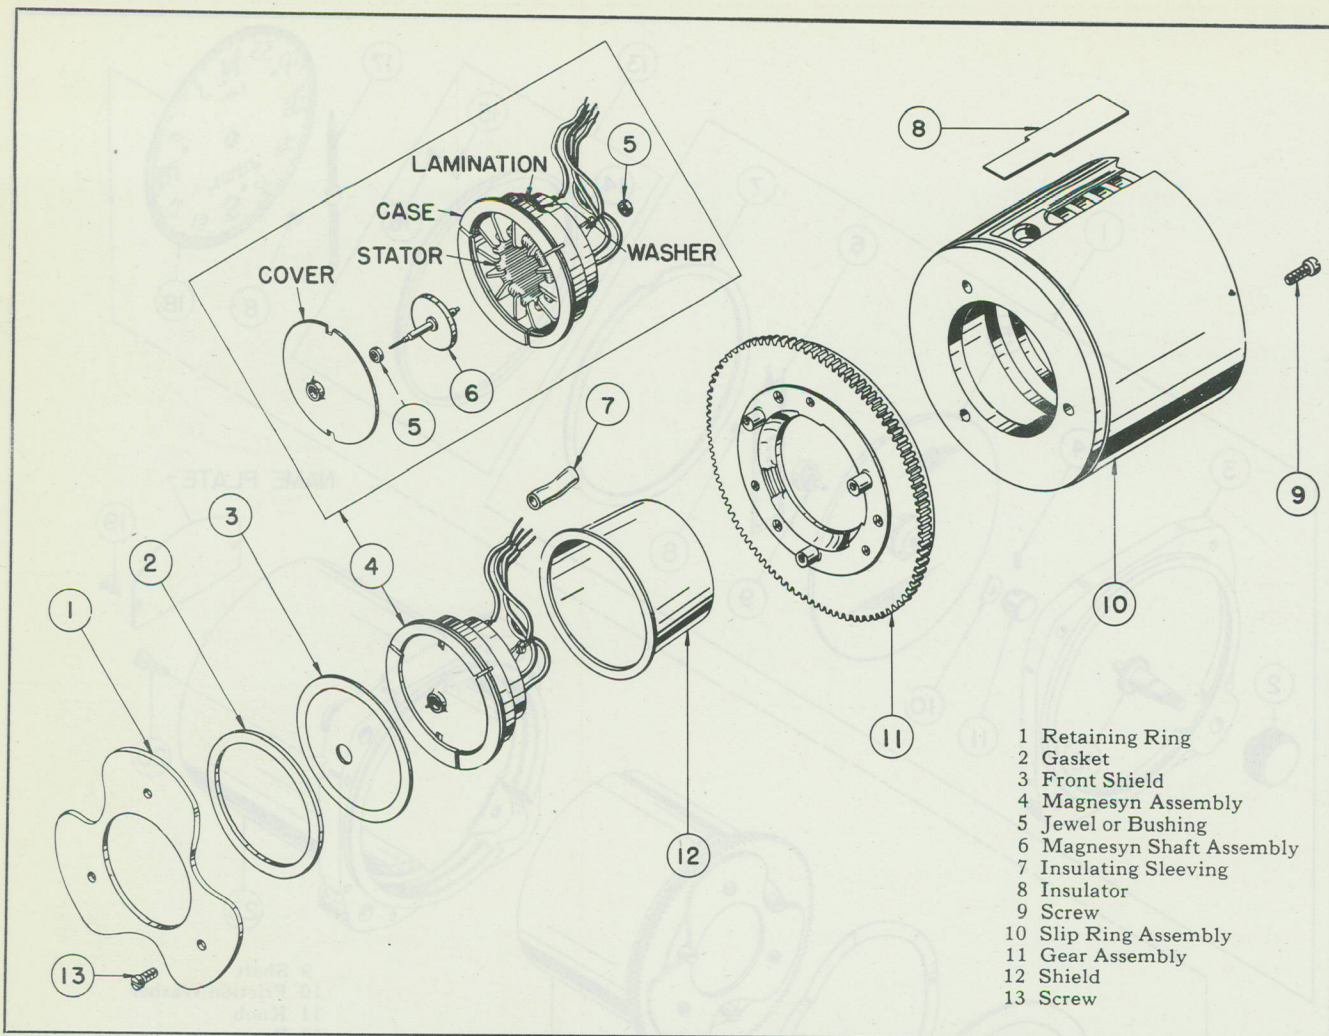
D—Exploded View—Stripped Assembly—Indicator—Type AN 5730-2A,
